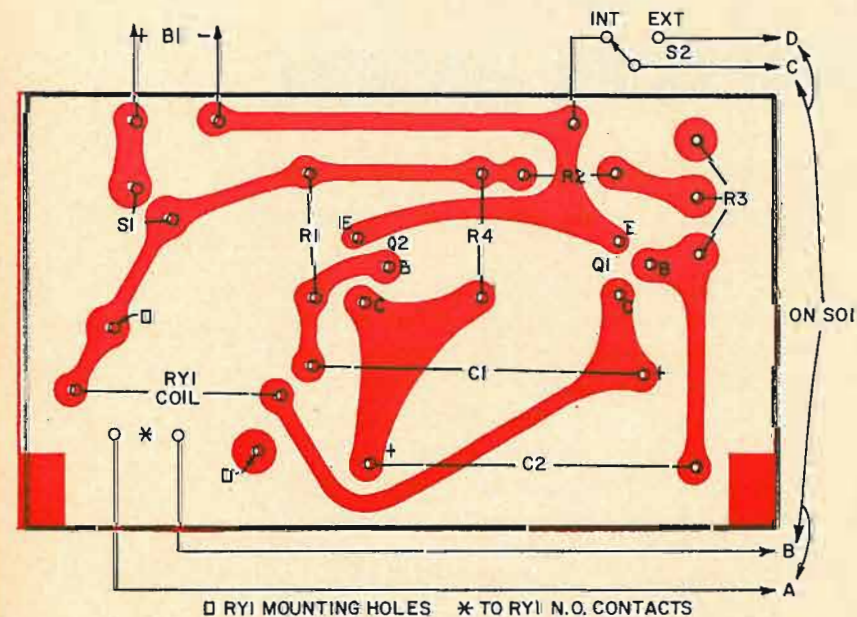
Foil side of PC board showing location of components. PC board is optional.
